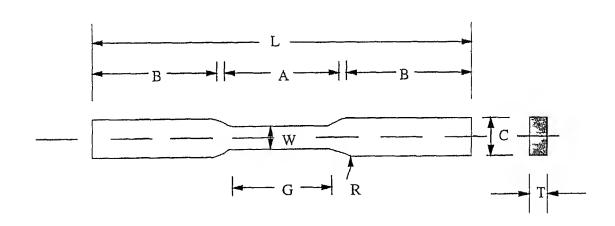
Rectangular tension-test specimens[from ANSI/ASTM Standard A 370-77]
